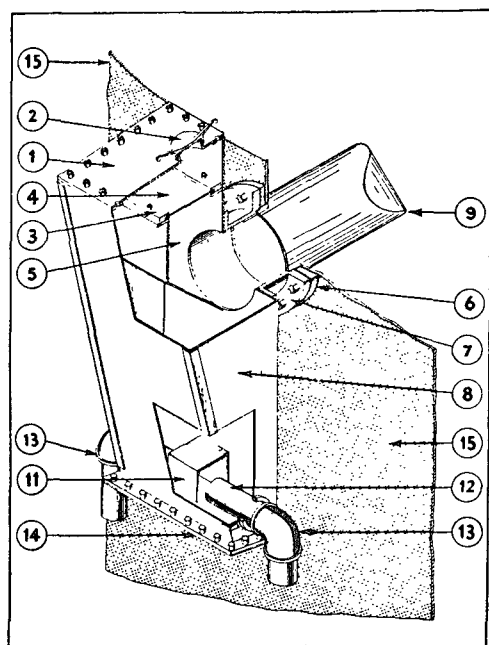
E. Chemical foam chamber. (1) Top plate. (2) Inspection cap. (3) Diaphragm frame. (4) Diaphragm. (5) Inner chamber. (6) Adapter flange shaped to fit tank curvature. (7) Chamber throat and mounting flange. (8) Chamber body. (9) Deflector. (11) Baffle. (12) Inlet nipples. (13) Inlet solution elbows. (14) Bottom plate. (15) Tank shell.
